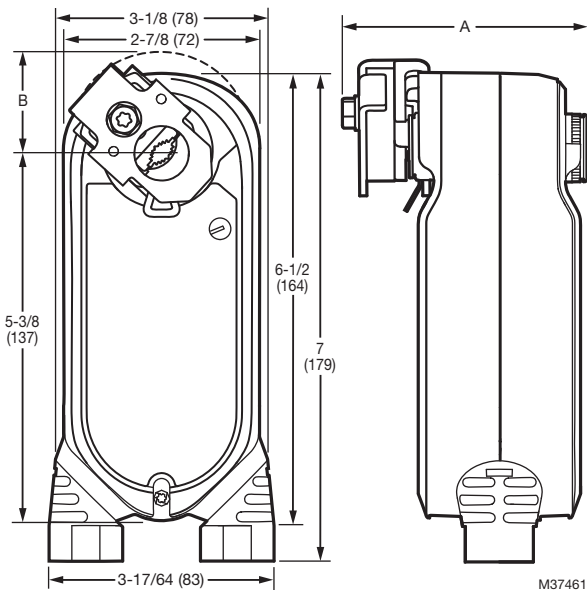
Dimensional drawing of actuator in in. (mm). See Table 2 for A and B dimensions.
